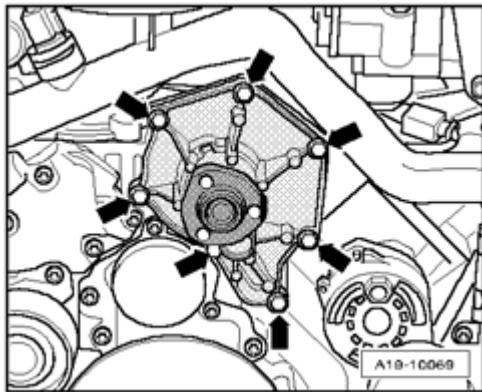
Removing Bolts For Coolant Pump And Coolant Pump
